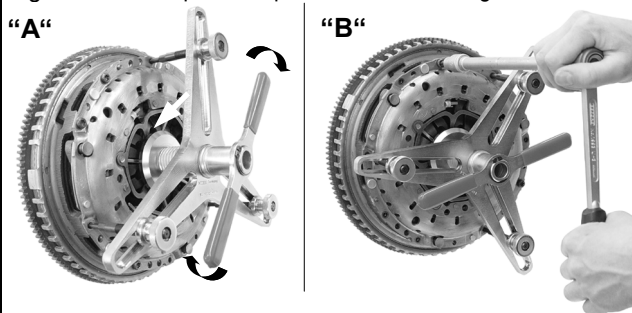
Turn back pressure spindle, Take off clutch compressor.
